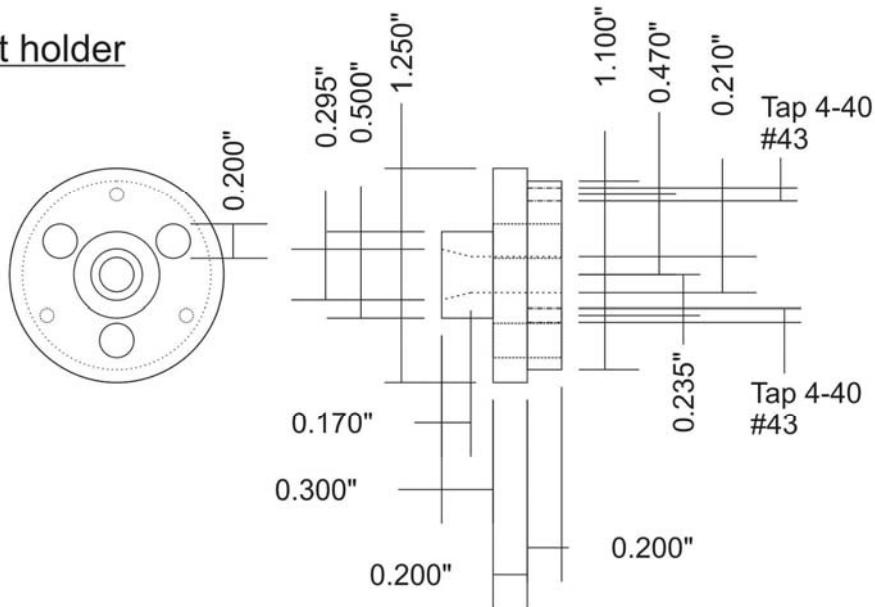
Collet holder. This part slides back and forth on the guide posts and holds the collet. Tightening the collet is done by tightening the collet holder part 2 and with that pulling the collet into the collet holder. The cones of the collet and of the collet holder then press against each other and clamp the collet tightly around the ferrule. The collet holder is held in place within the adjustment ring by the front rim on the collet holder and by three screws with Teflon washers (not shown here, cf. Figure 8.2) in the back.
